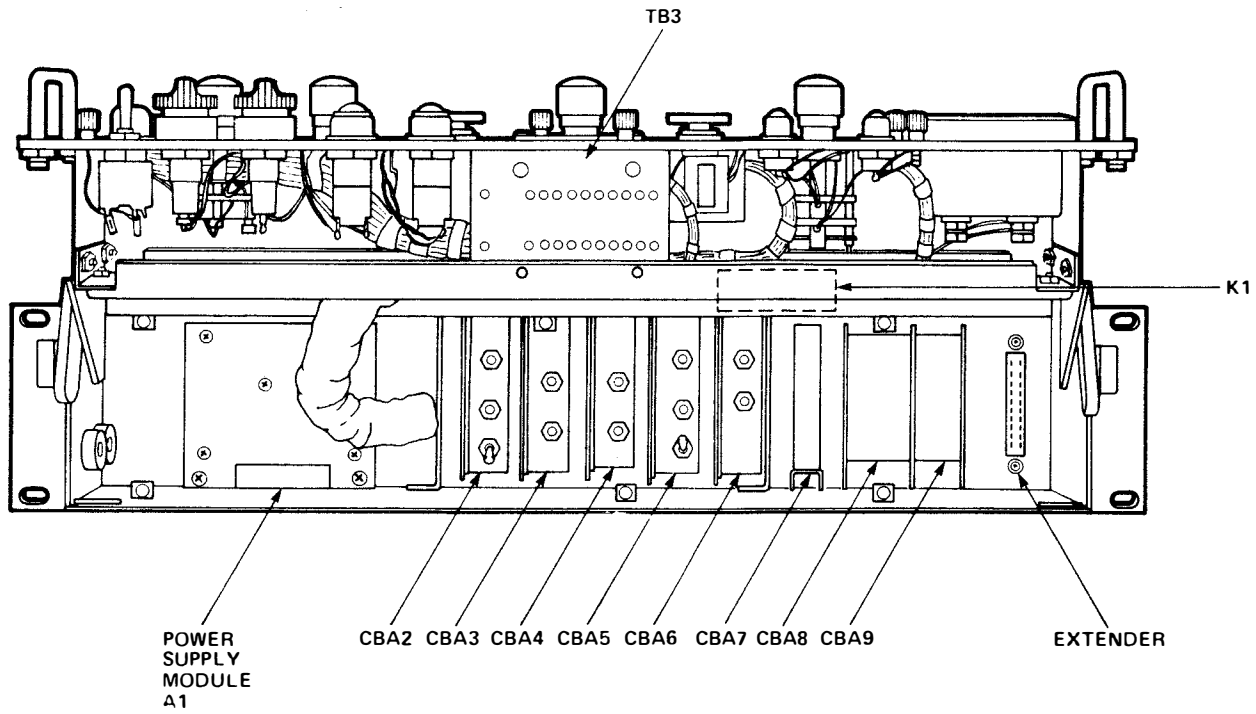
Chassis Parts Location, Interior (Sheet 2 of 2)
